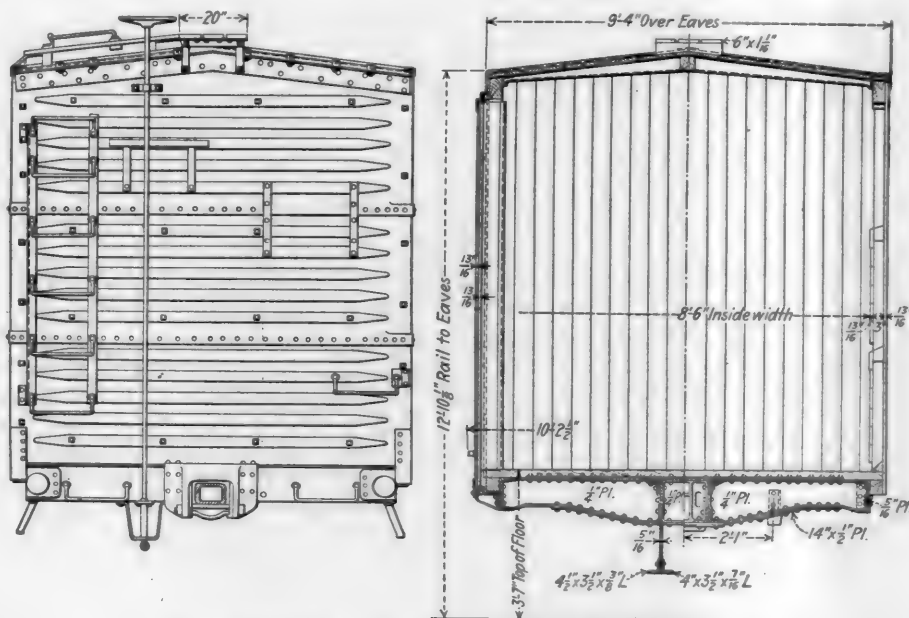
Sections of the 40-Ton Double Sheathed Box Car
